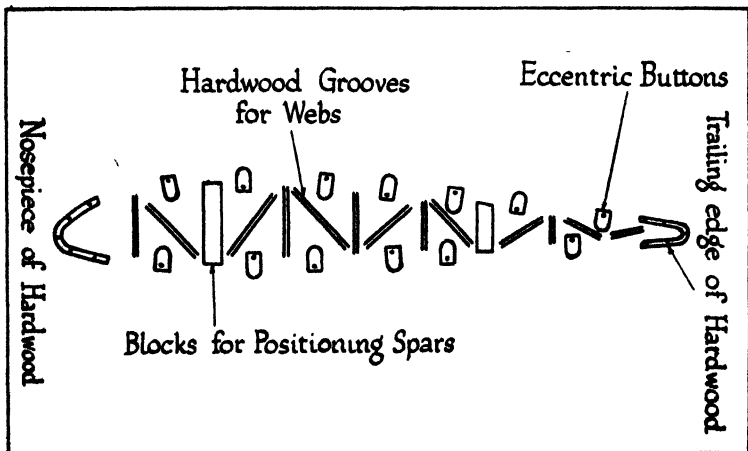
JIG BOARD FOR MAIN PLANE RIB
